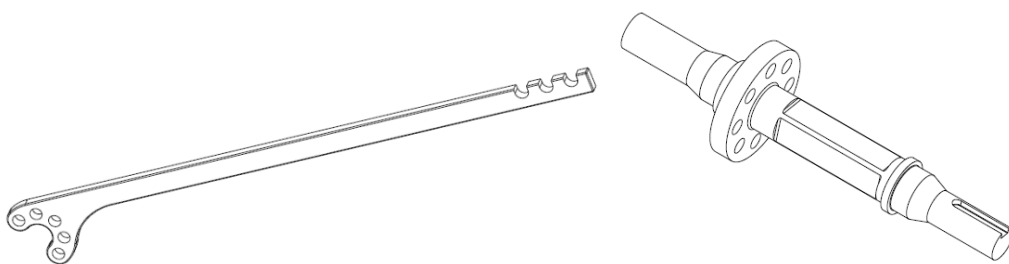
Isometric views of Lever and Torque Application Shaft
